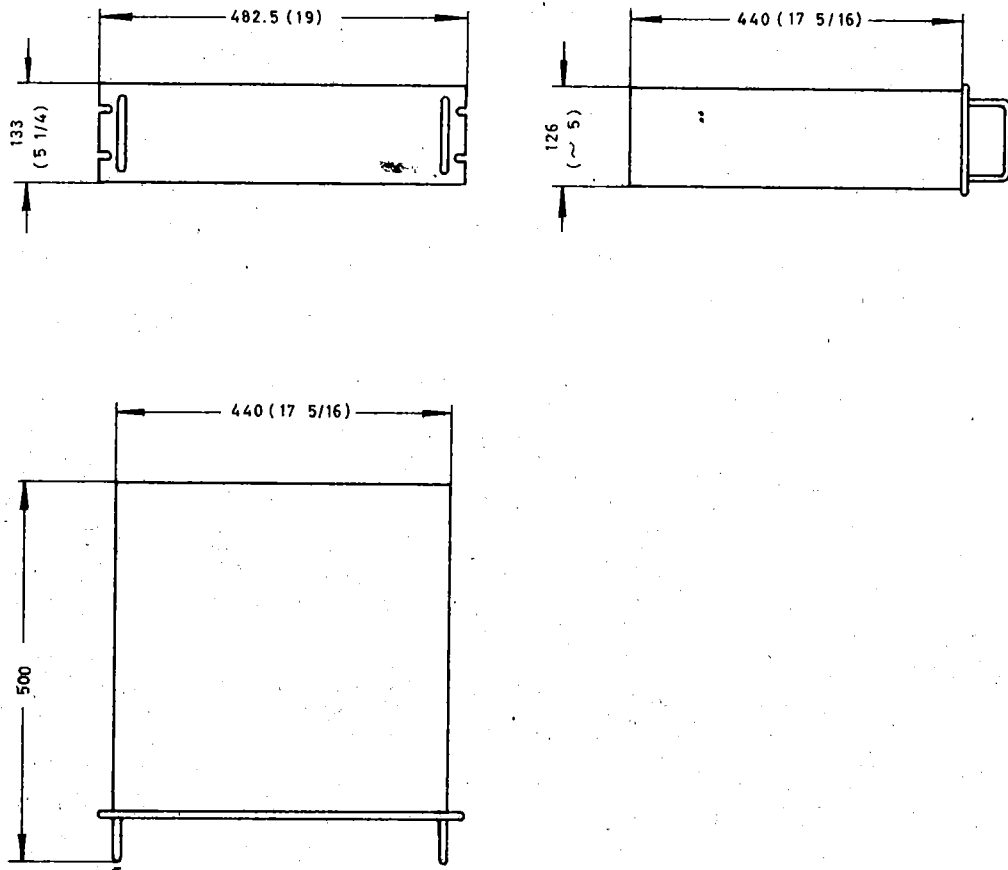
Dimensions in mm (inch) of each rack-mounting unit
